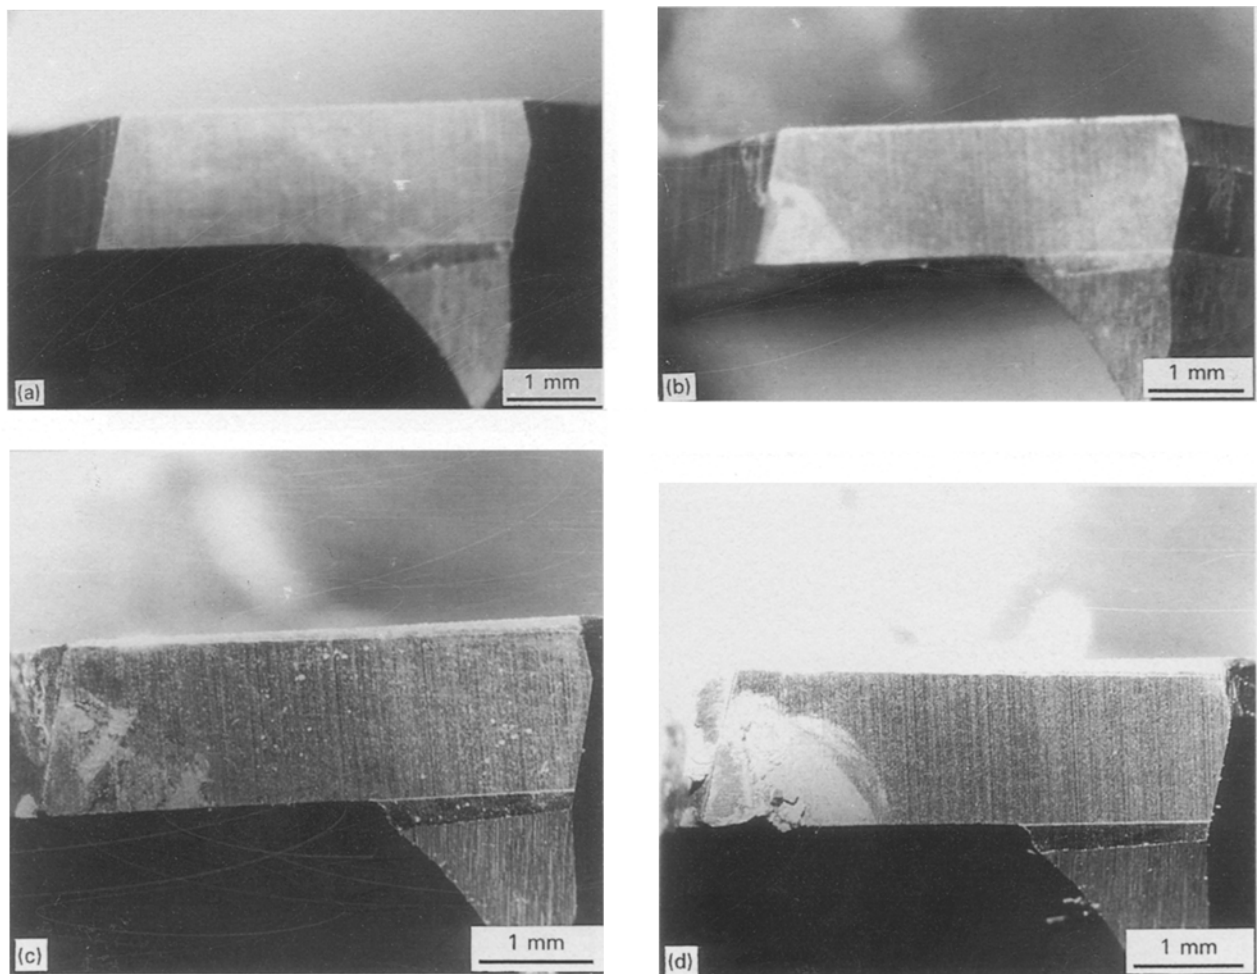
WC flank wear after (a) hole 0, (b) hole 1, (c) hole 25, and (d) hole 50.
